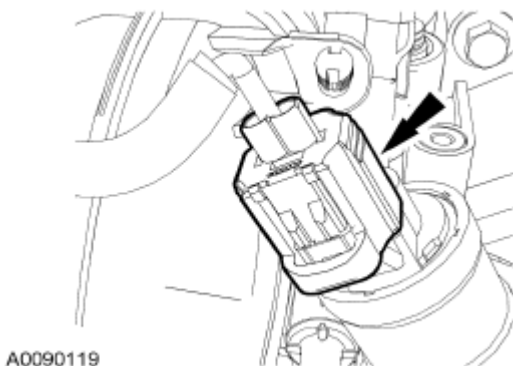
Locating Idle Air Control (IAC) Motor Electrical Connector
